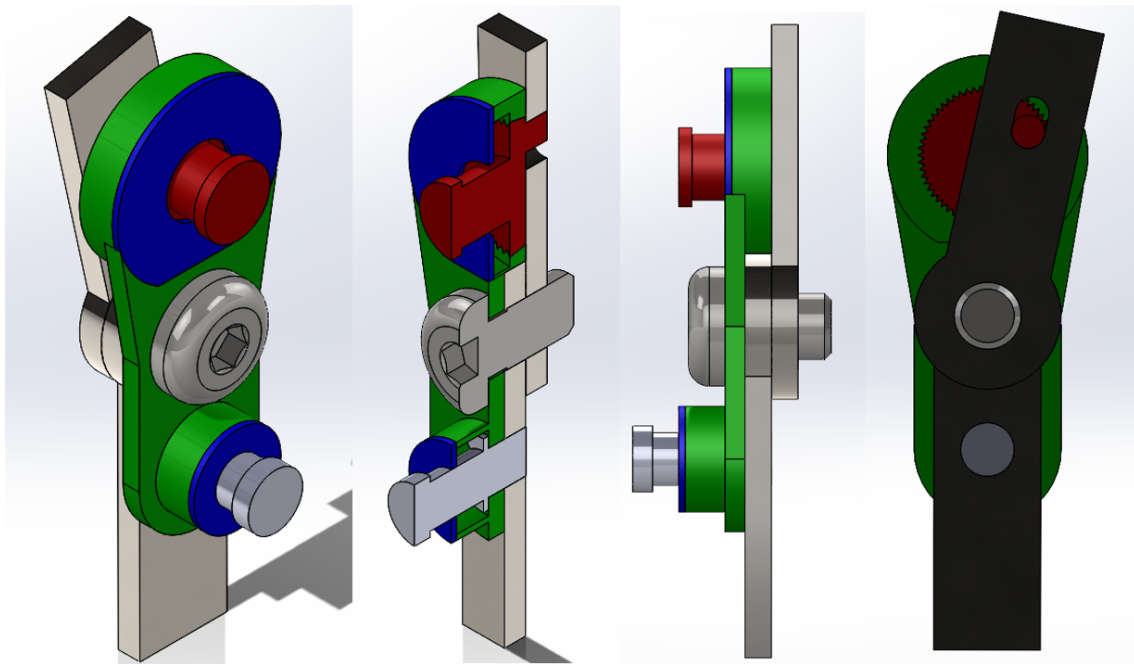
Concept design with adjusted dimensions for bars and axle. The red gear can be pulled out to adjust the alignment angle. A spring will cause the gear to return to a locked position. The pin at the bottom can be pulled out to unlock the mechanism.
